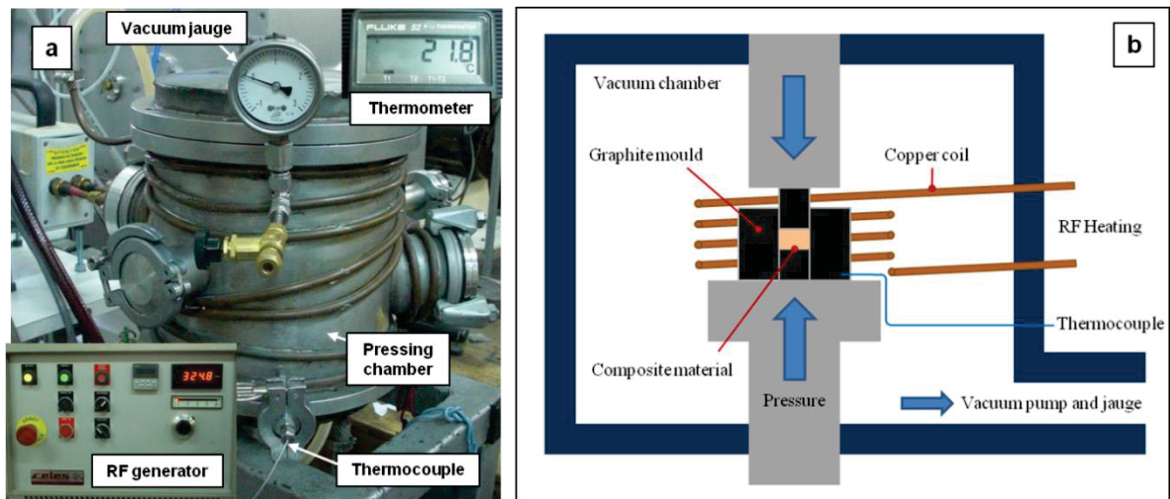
(a) Photograph and (b) scheme of the uniaxial hot pressing machine [209].
